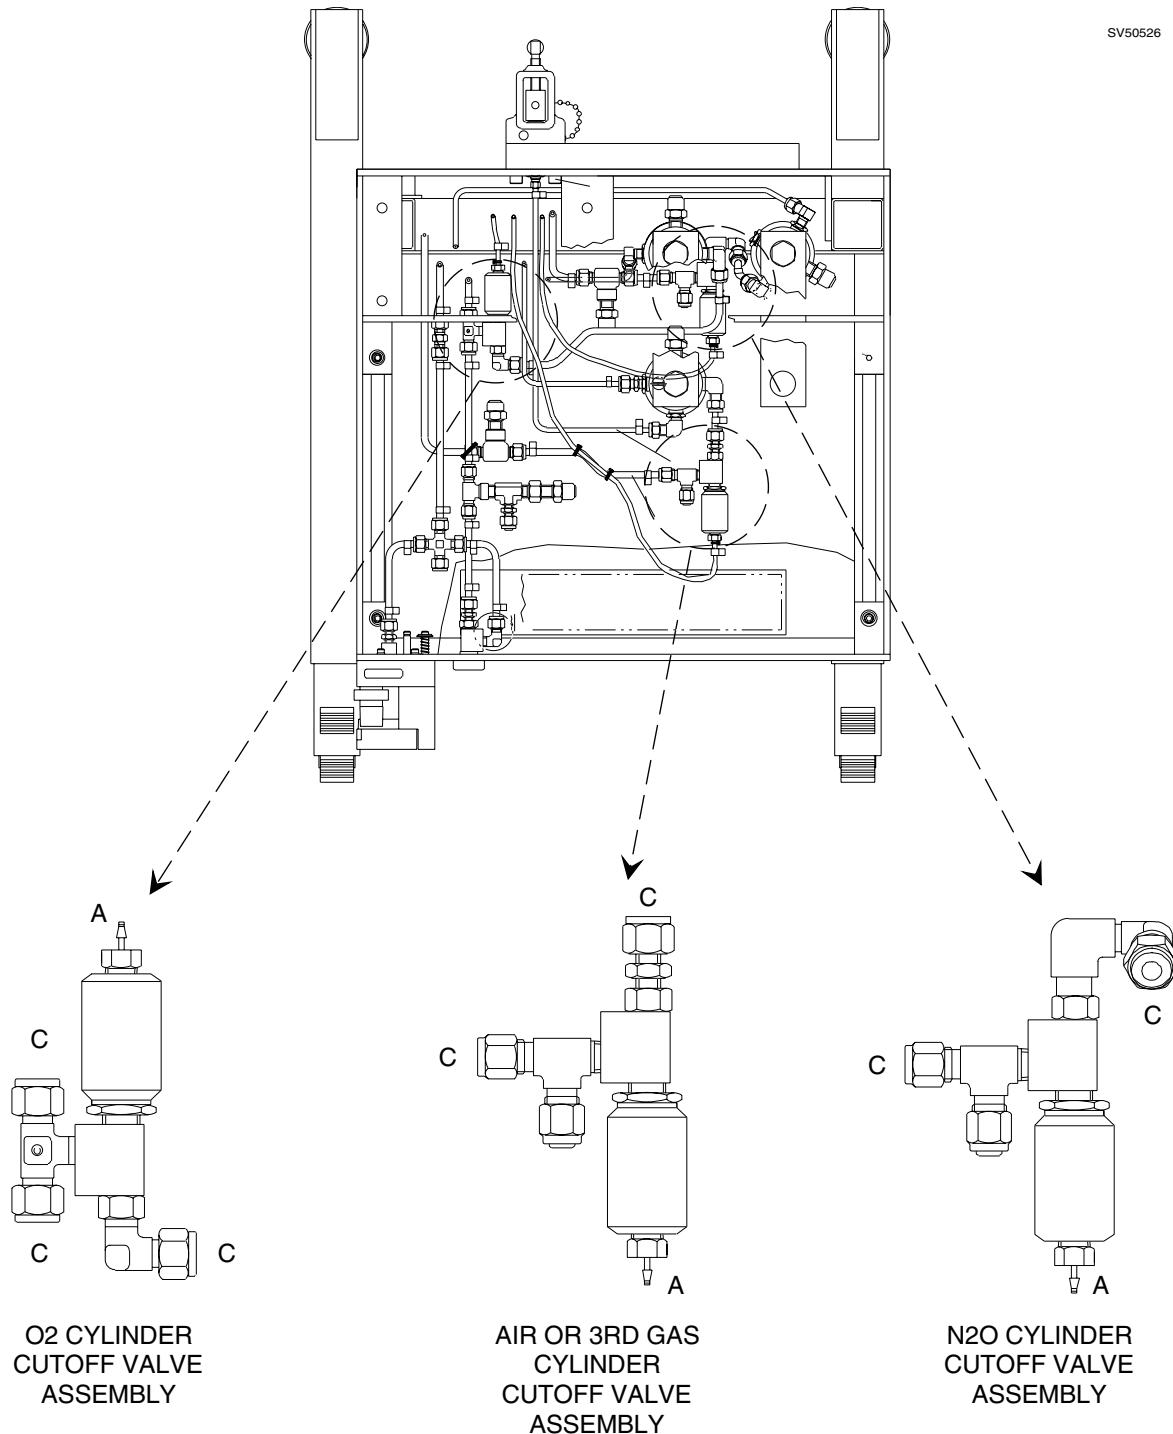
CYLINDER CUTOFF VALVES (CANADA)
